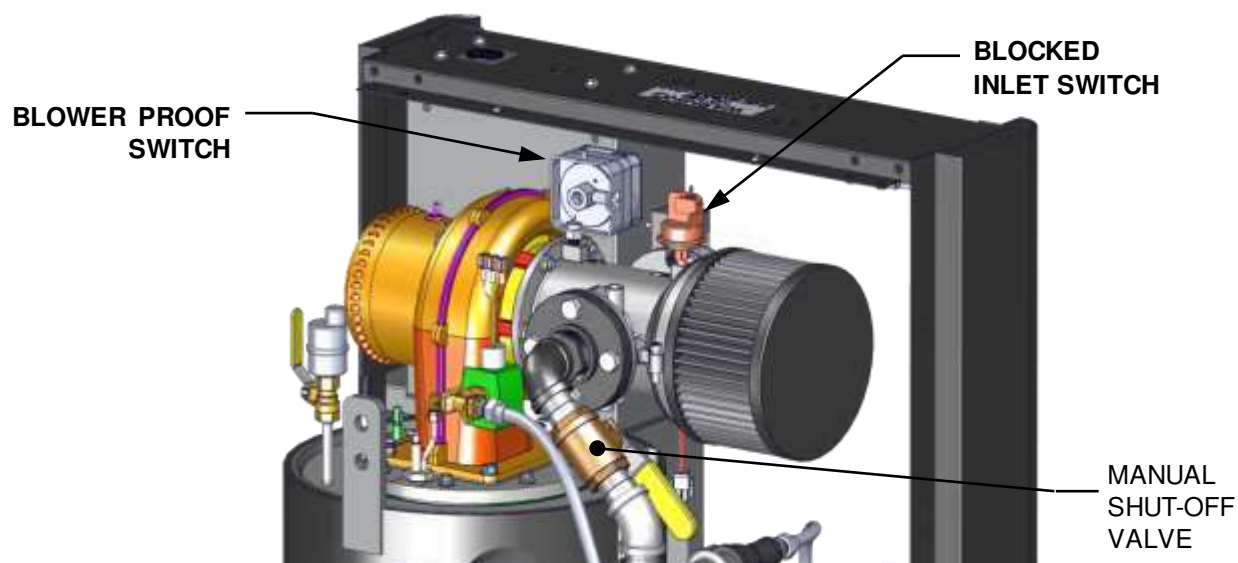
Blower Proof & Blocked Inlet Switch Locations – BMK750 & 1000
